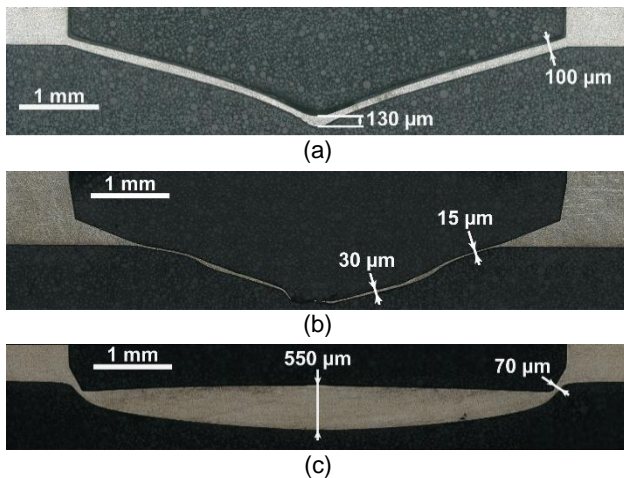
Cross-sections during the burr formation of the tool 1 at 7.05 mm depth (a), the tool 2 at 6.9 mm depth (b) and the tool 3 at 6.3 mm depth (c)
